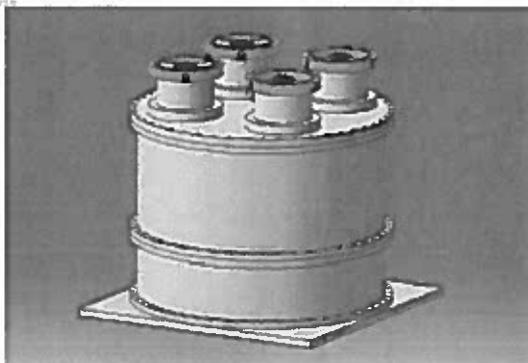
Model of 4-Port Switch. Eleven switches will be used in the RF Building.
